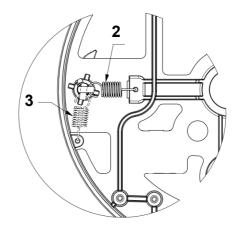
Locking mechanism of the aluminum cable rewinder for type 601KR/DW
